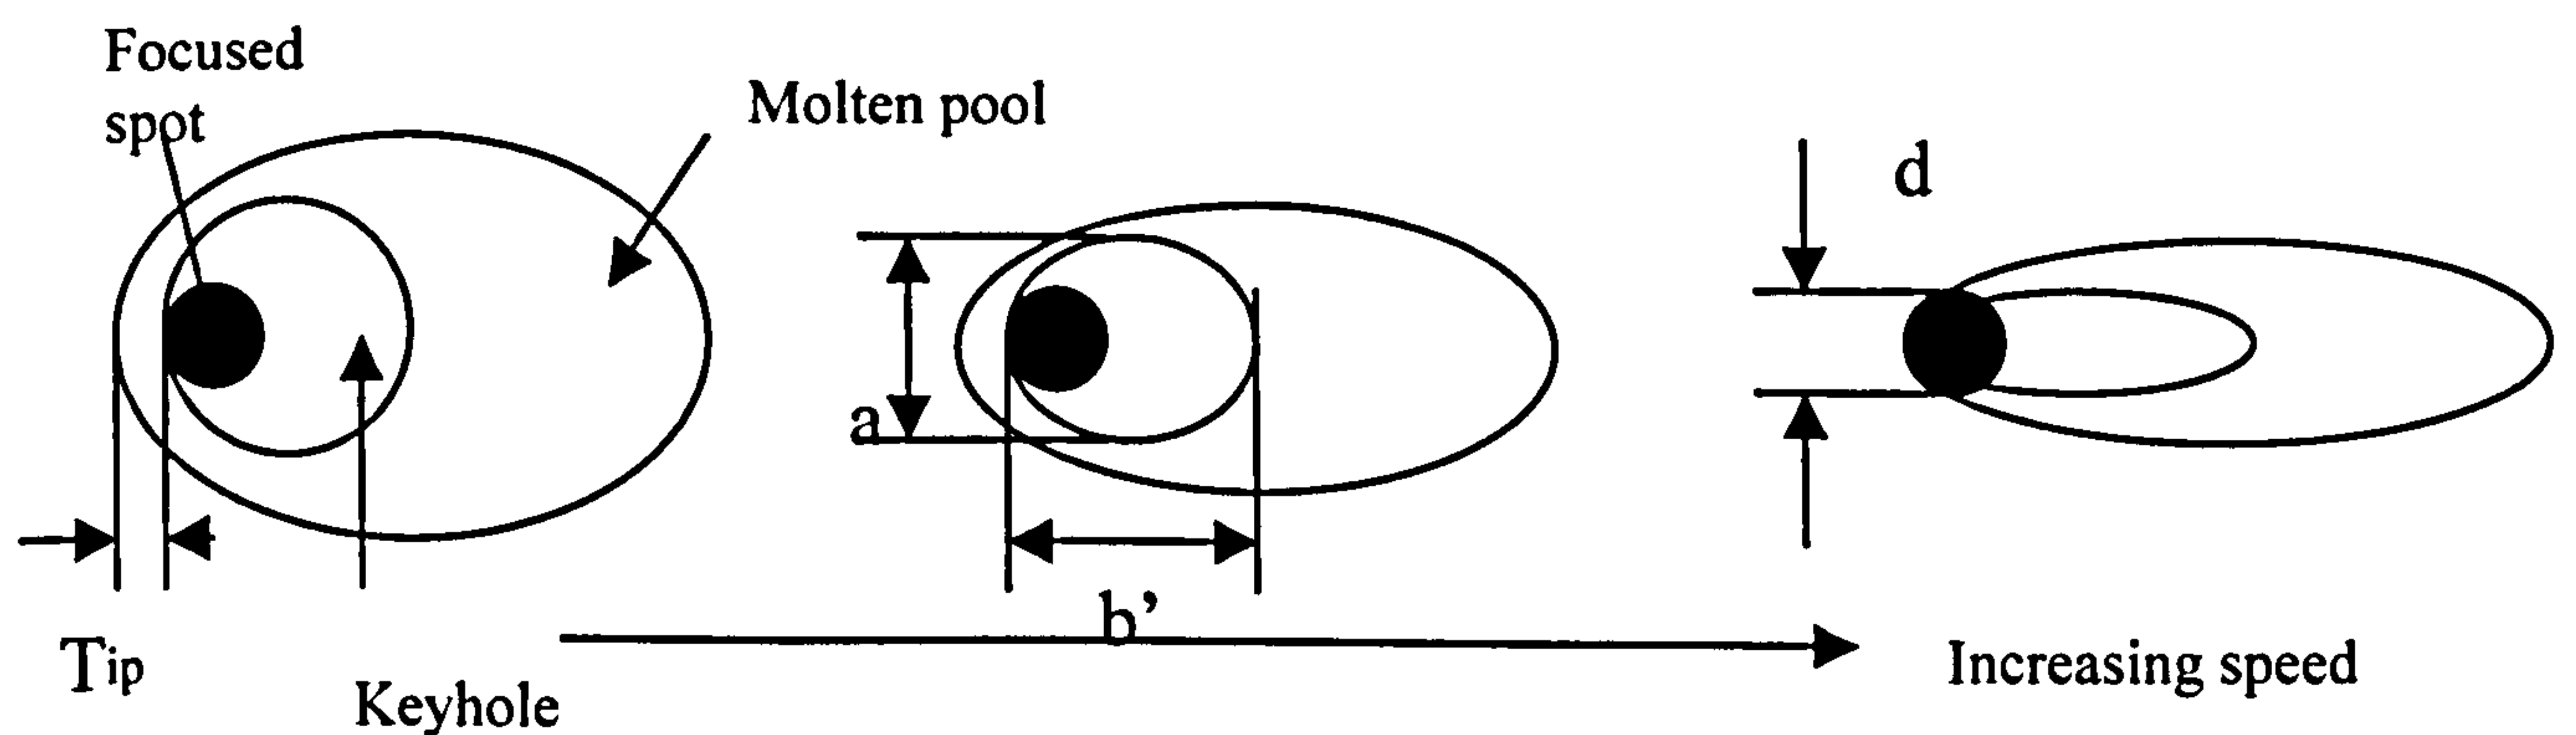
Changes in keyhole shape with increasing welding speed. Semak [104]
